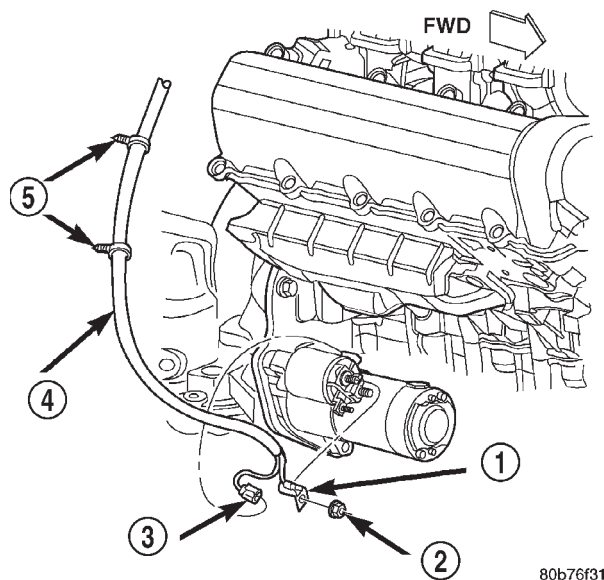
Starter Wire Harness Remove/Install - 4.7L Engine
